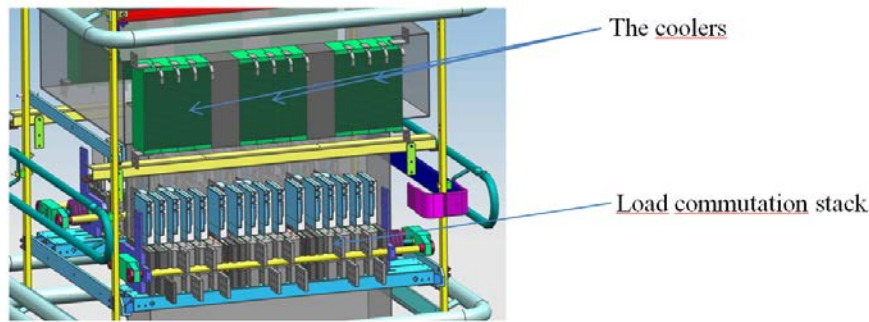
Press-pack assembly of the LCS with thermosyphon cooling system
